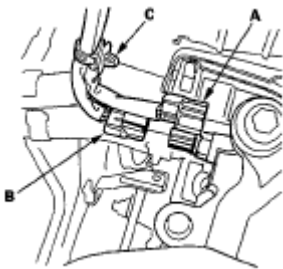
Locating Camshaft Position Sensor, Engine Coolant Temperature Sensor 1 Connector & Harness Clamp
